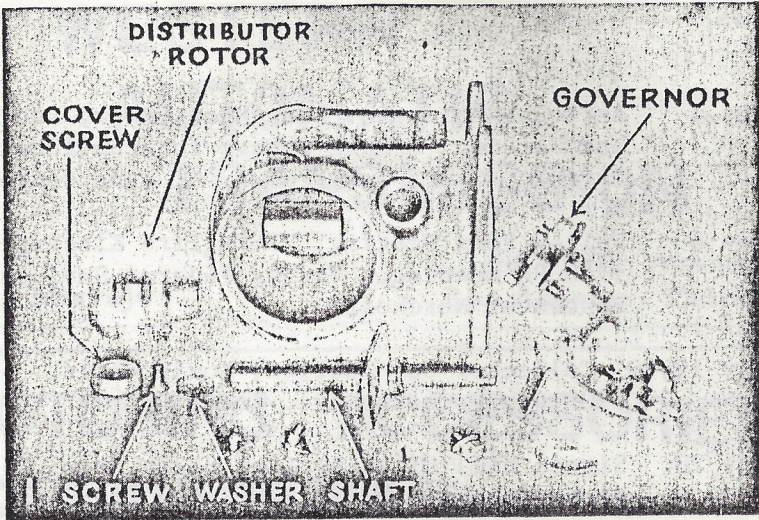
Parts of the Mallory Ford V-8 Ignition Unit, ready to be assembled
